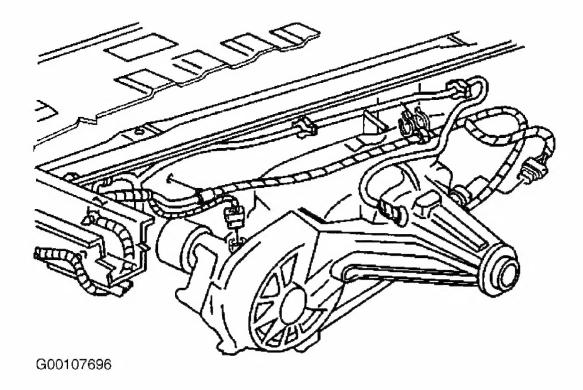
Removing Electrical Wiring Harness From Transfer Case Courtesy of GENERAL MOTORS CORP.
